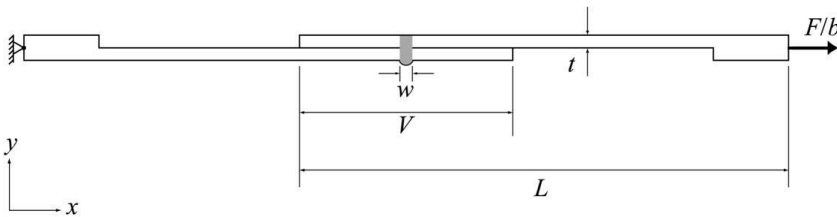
A schematic of a two-dimensional finite element model of a lap-shear specimen with a weld bead.
